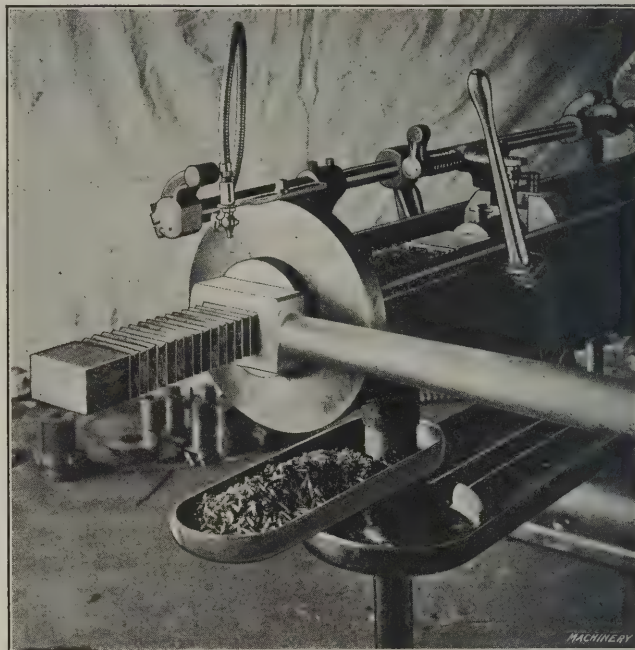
Broaching Connecting-rod End in Lapointe Machine
